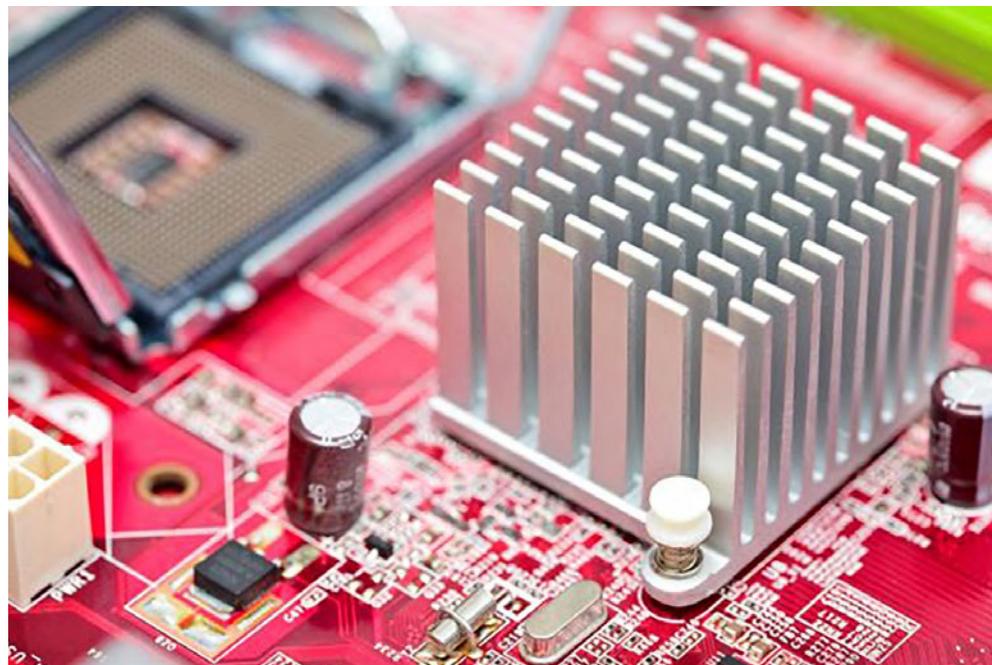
Heatsink with retaining pins that extends beyond the package body.
